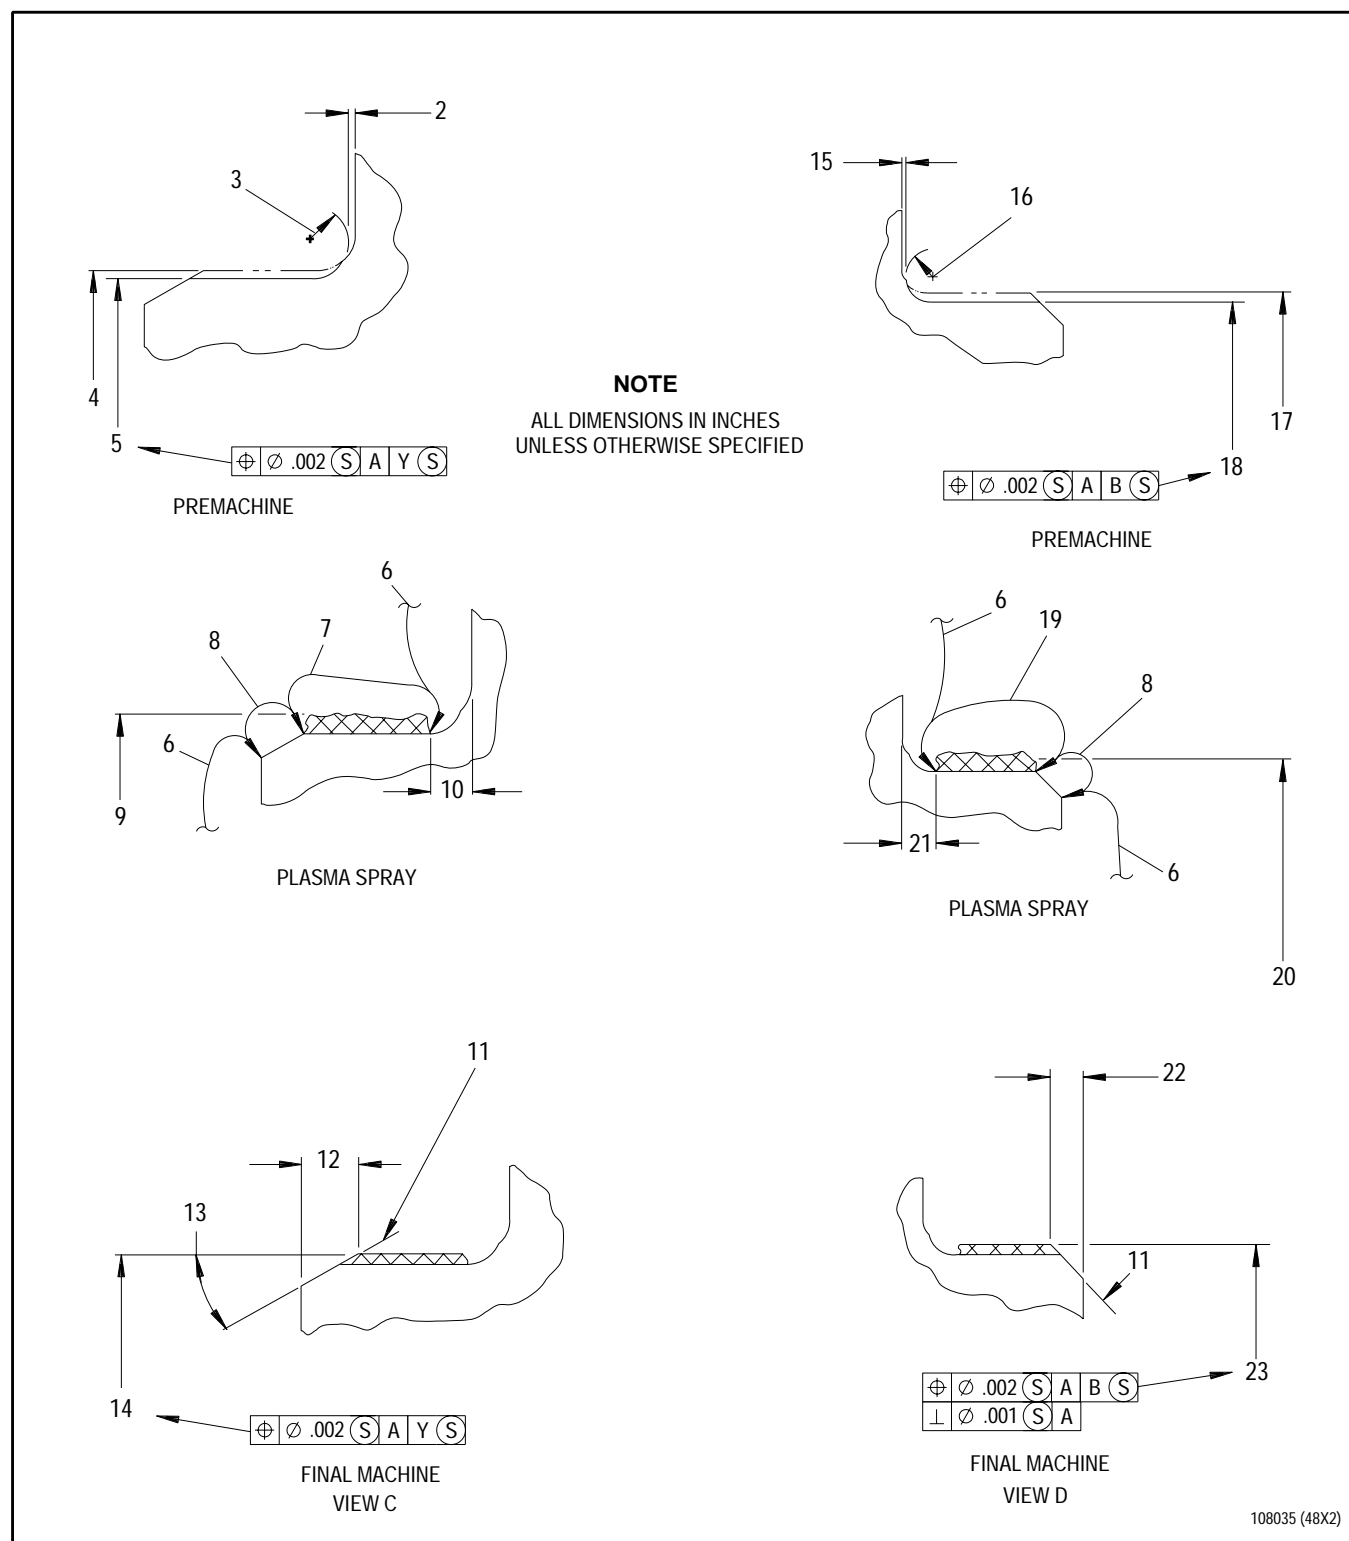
Compressor Stator Support Assembly - Forward and Aft Snap Diameter Plasma Spray Repair (Sheet 1 of 2)
